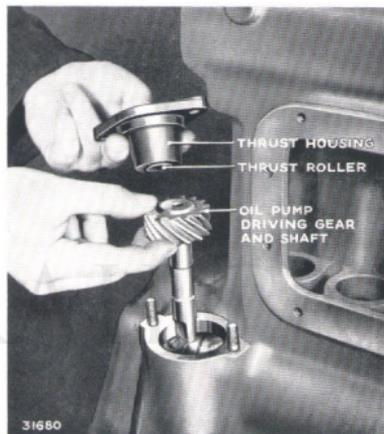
Fitting oil pump drive gear and thrust housing (engine in stand).
